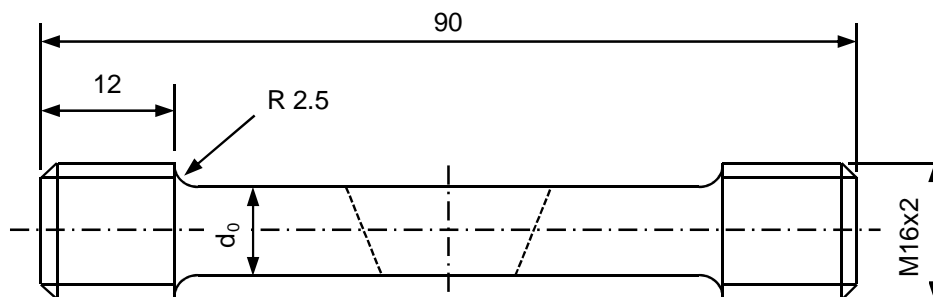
Sample geometry of cross-welded specimens. The weld metal zone is symbolically presented as a dashed line
